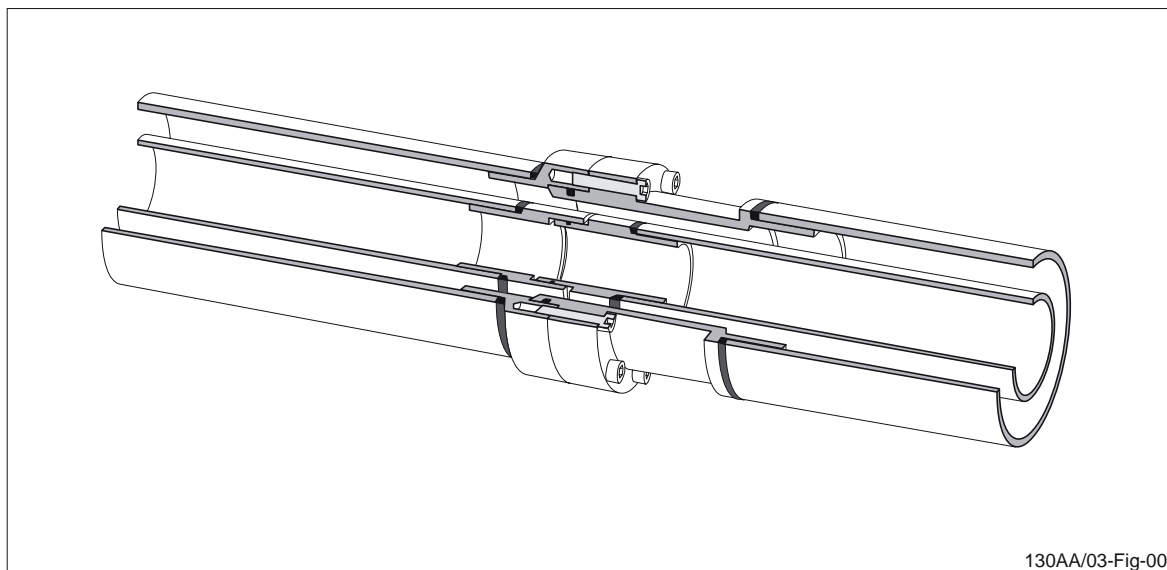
The twin tube flanges are bolted together and the bolts are locked by loctite.
